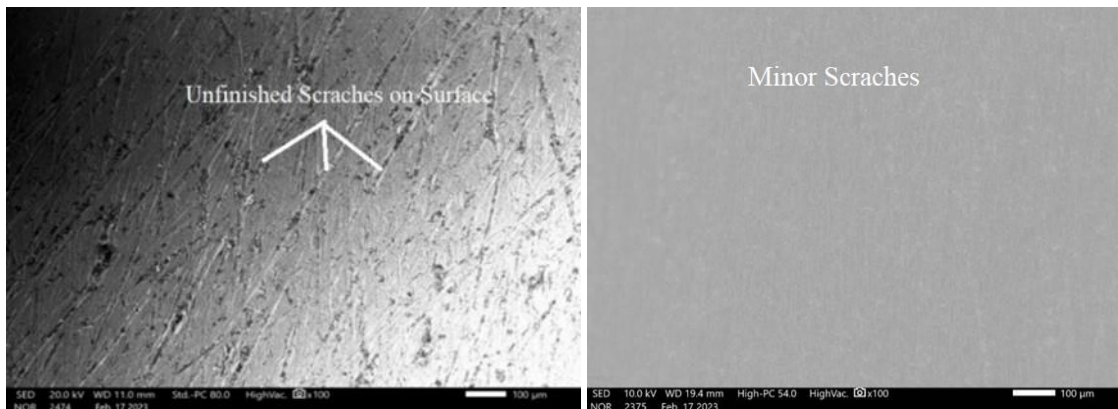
SEM images of a specimen of the Al-6061 alloy (a) before machining and (b) after machining
